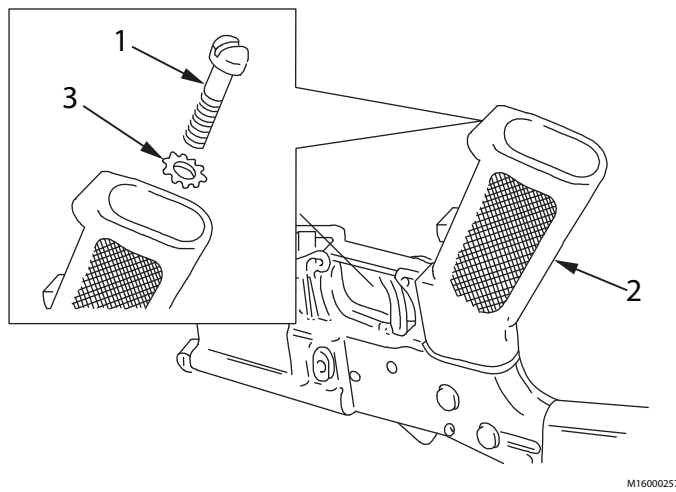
Securing Pistol Grip with Lock Plate Removed.
